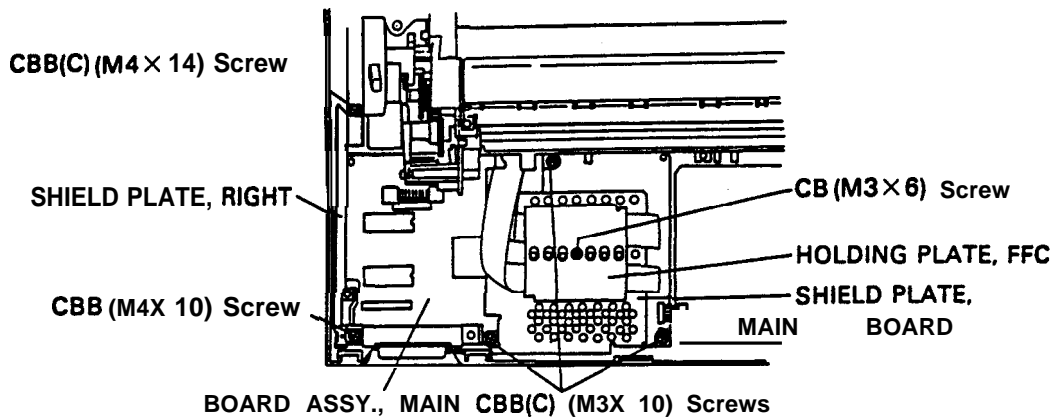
Removing the Shield Plate, MAIN BOARD
